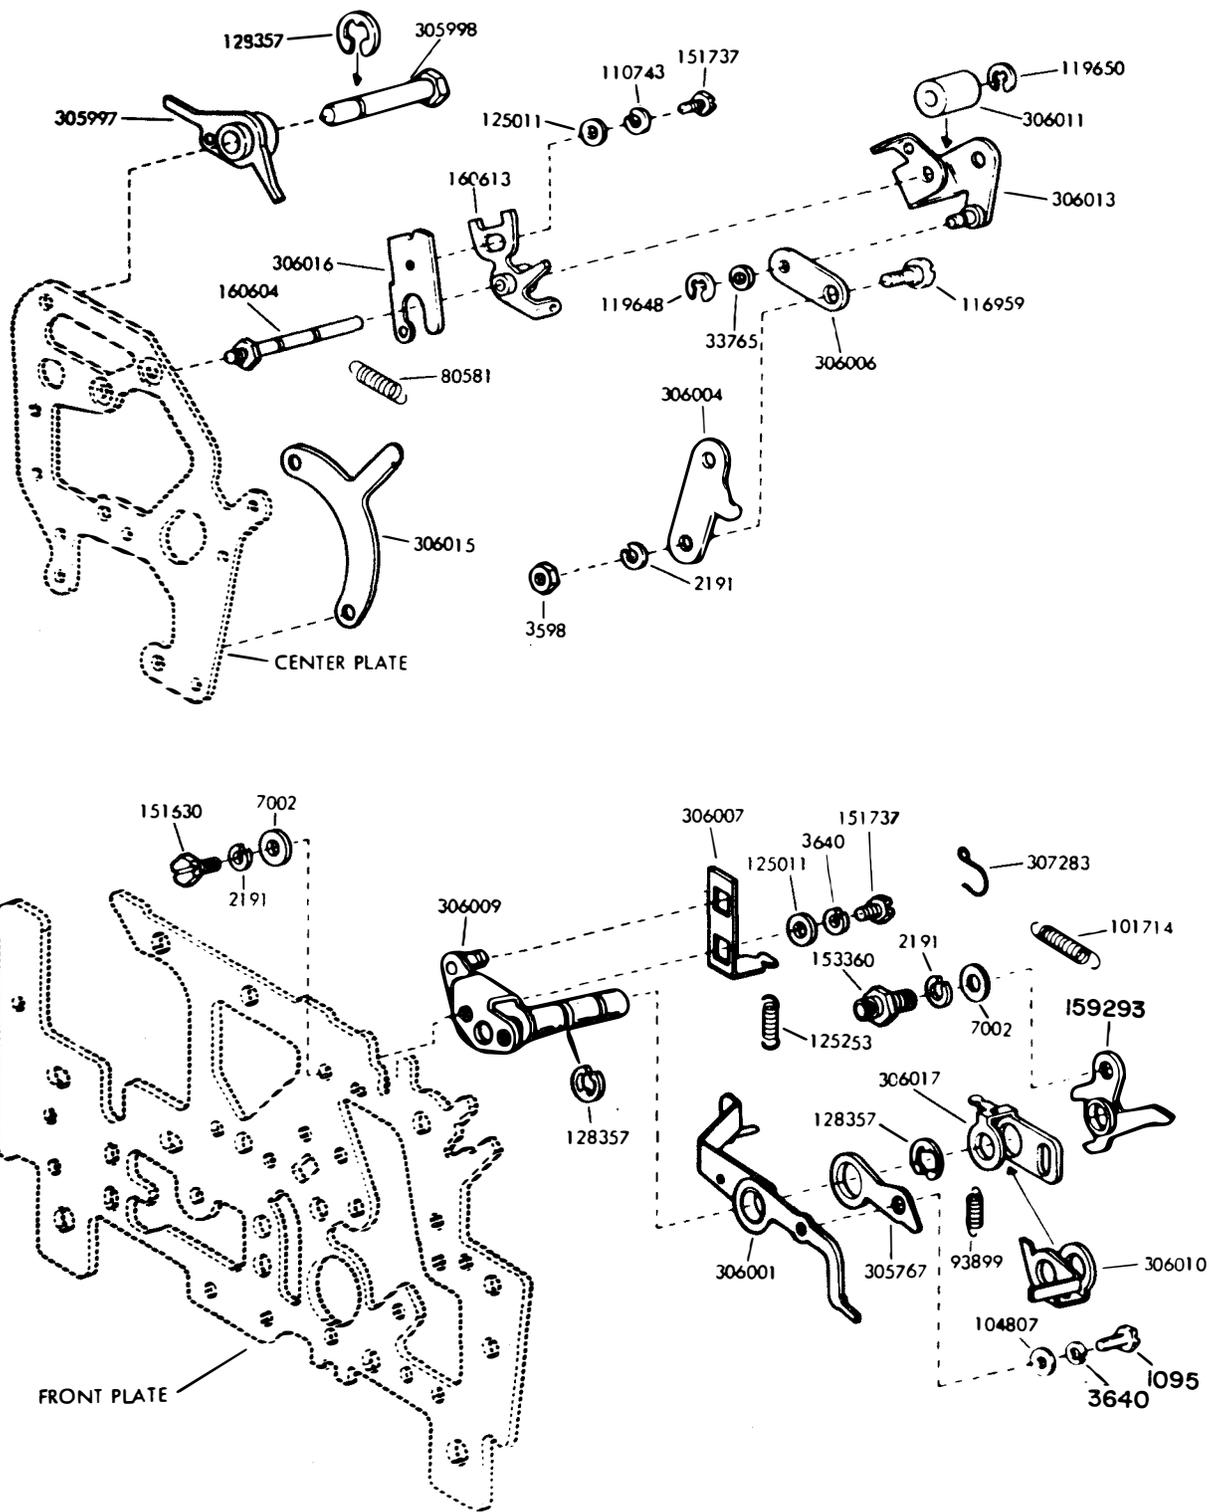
Tape-Out Mechanism for Mechanically Coupled Dual Transmitter Distributor (Early Design)
